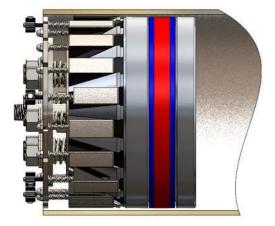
GripSafe ST ORB Auto-Locking Minimum Insertion Depth in a Sectioned Pipe
